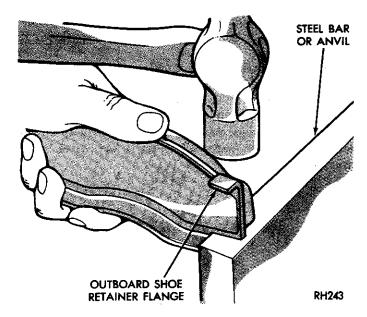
Adjusting Outboard Brakeshoe Retaining Flange
